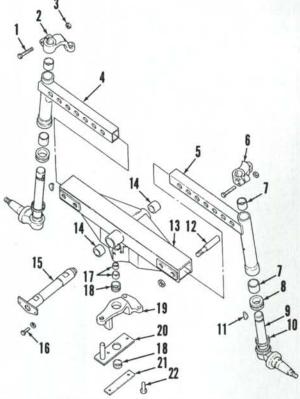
Exploded view of straight adjustable front axle used on some tractors.
